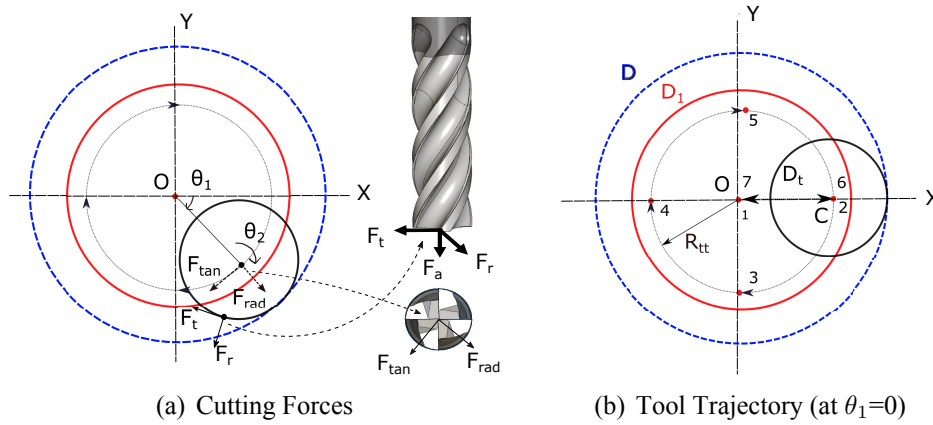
Referential Frames in X and Y indicating cutting forces and tool trajectory in circular milling
